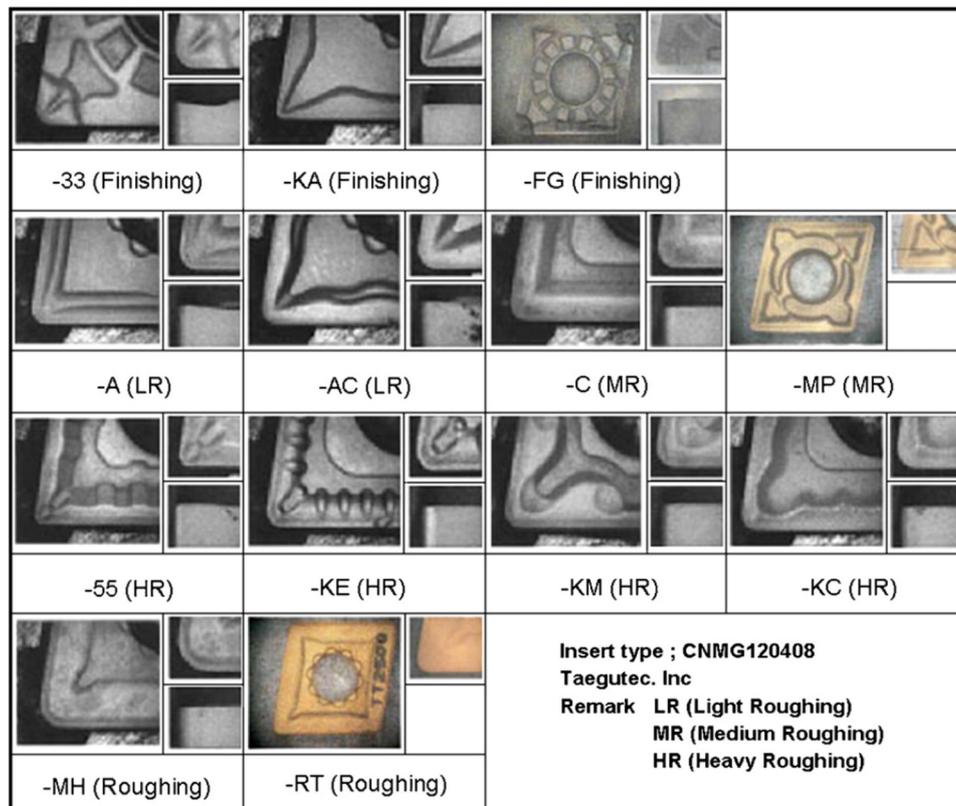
Cutting tools and corresponding chip breaker geometries [38].
